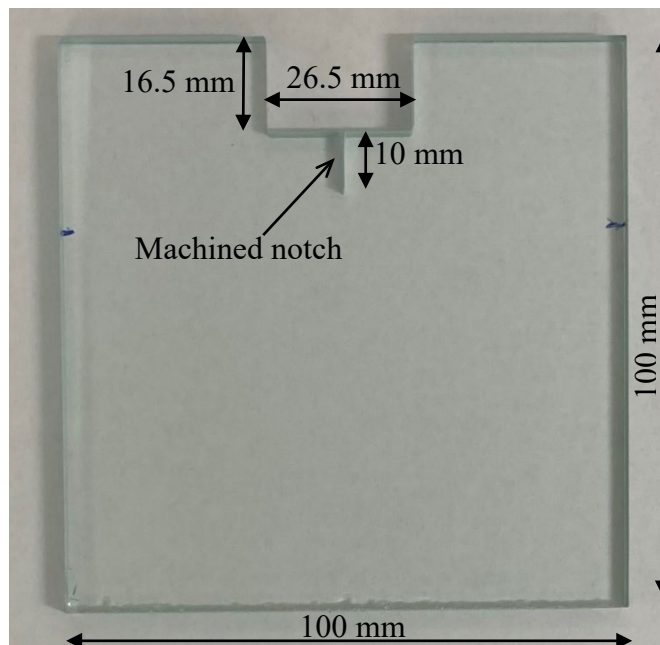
Wedge Splitting Test (WST) soda-lime glass specimen geometry with machined notch. (Plate thickness = 5.7 mm; notch length 10 mm).
